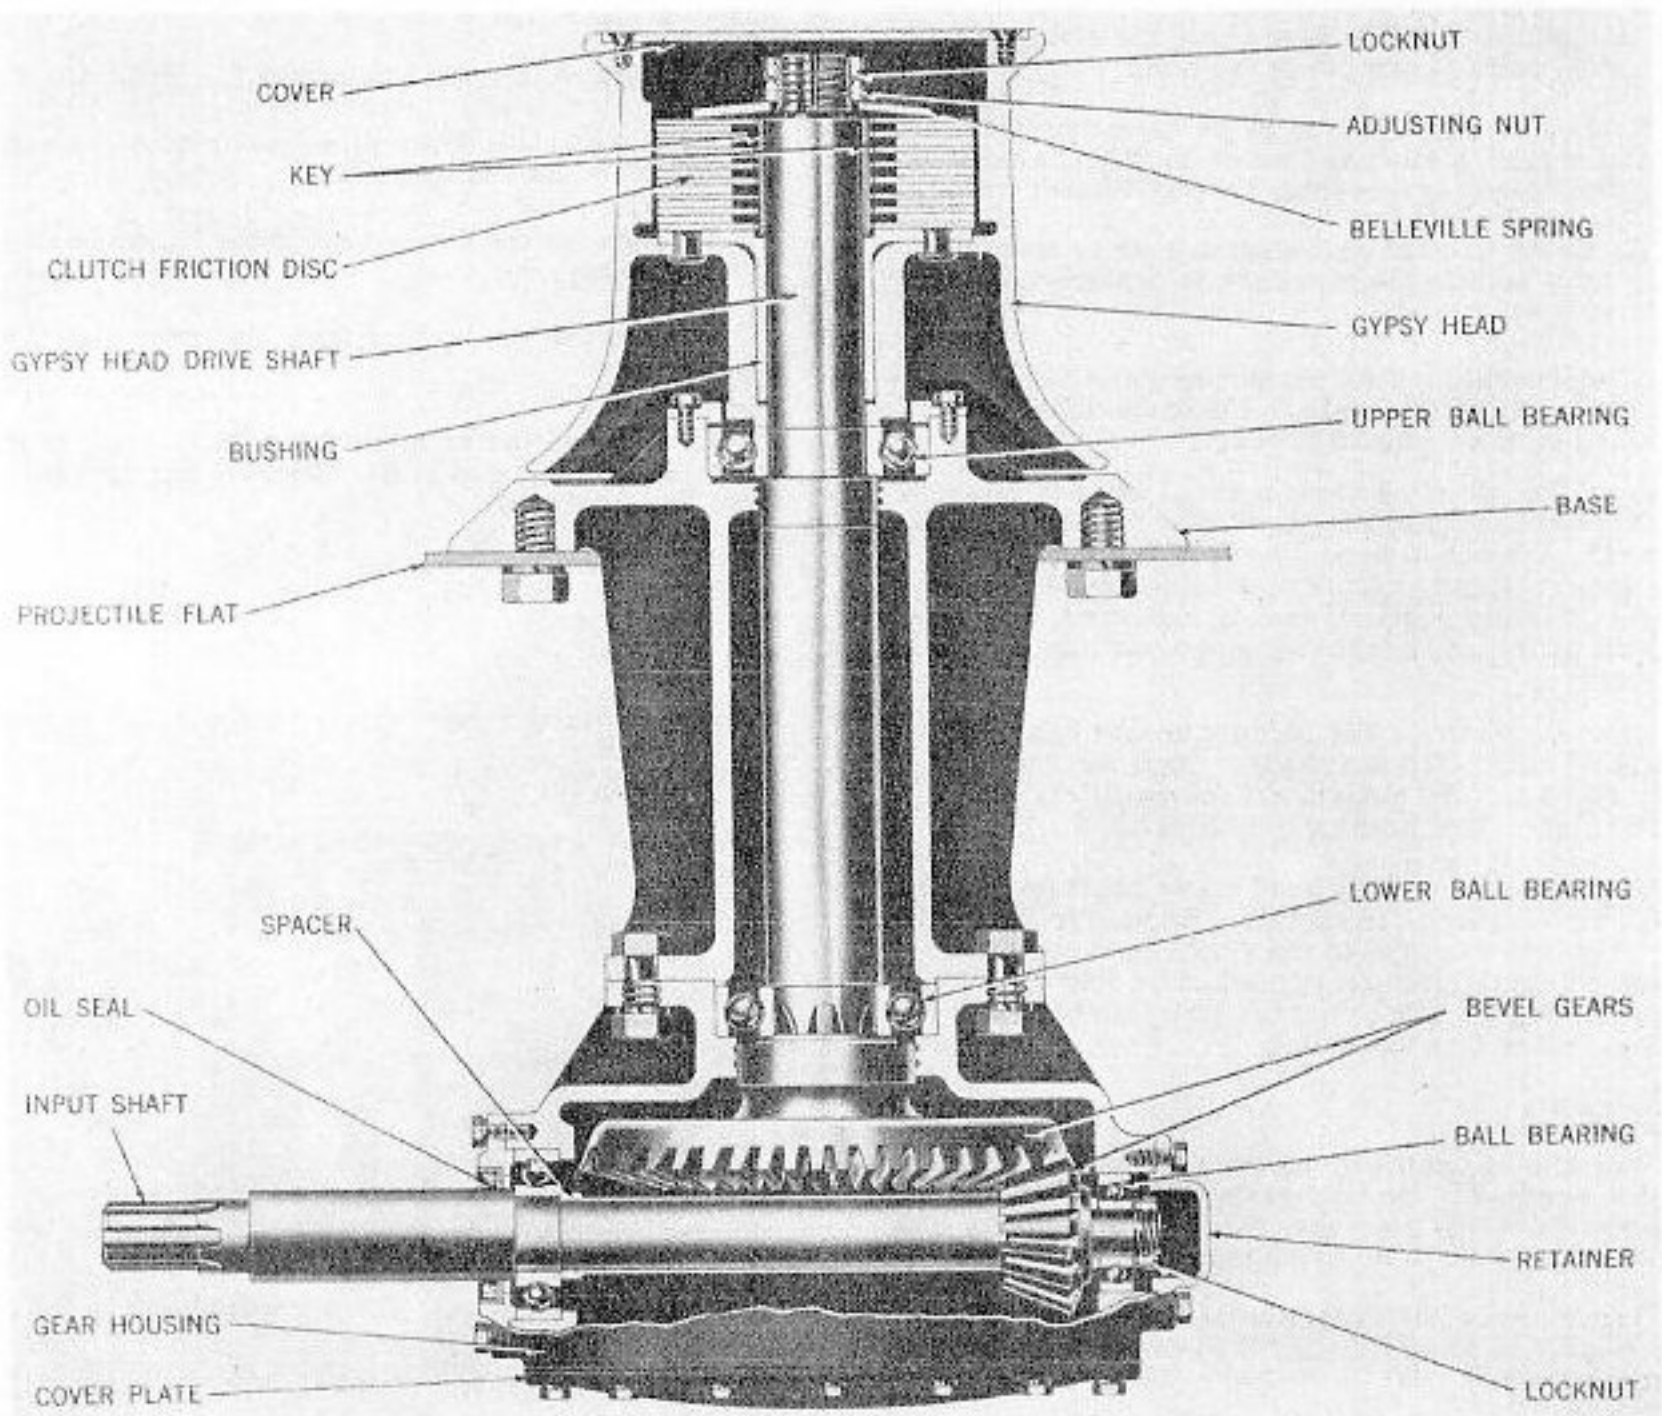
Gypsy Head Arrangement With Single Shaft Gypsy Head Gear Bracket, Cutaway View
